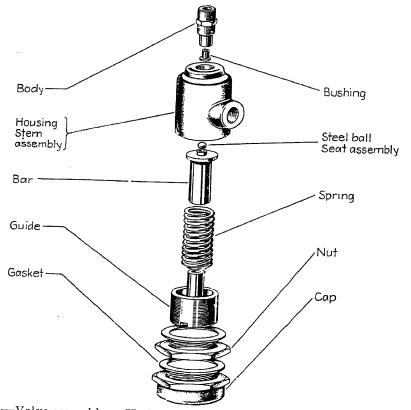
Valve assembly. Hydraulic relief. (Courtesy of Douglas Aircraft Co.)
